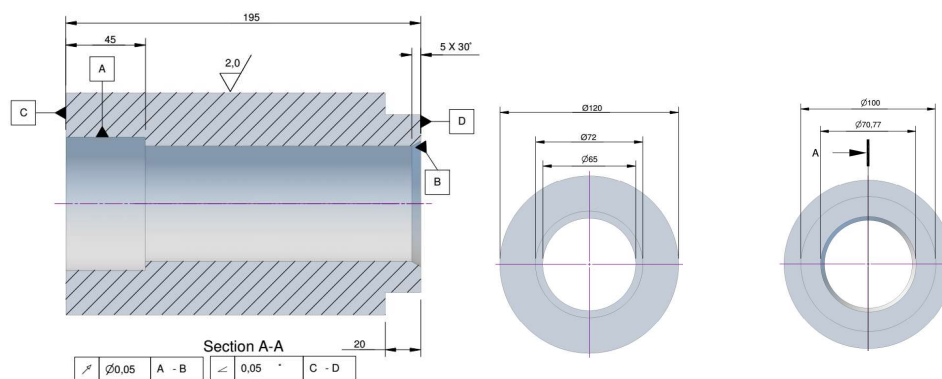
Drawing of the soft machined work piece for laboratory tests.
